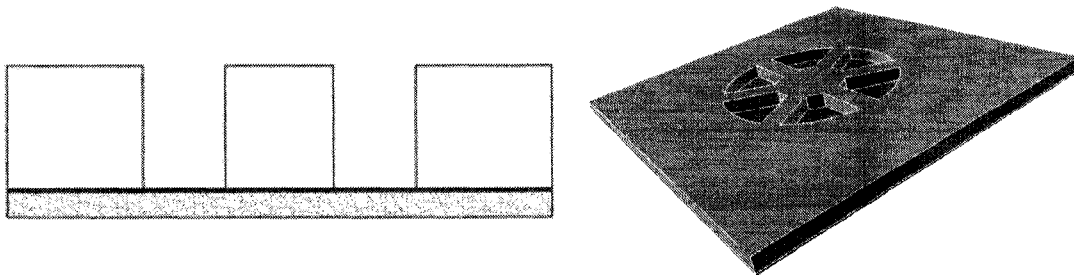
Rotor fabrication step 3 – patterning of openings for NdFeB pole pieces.
